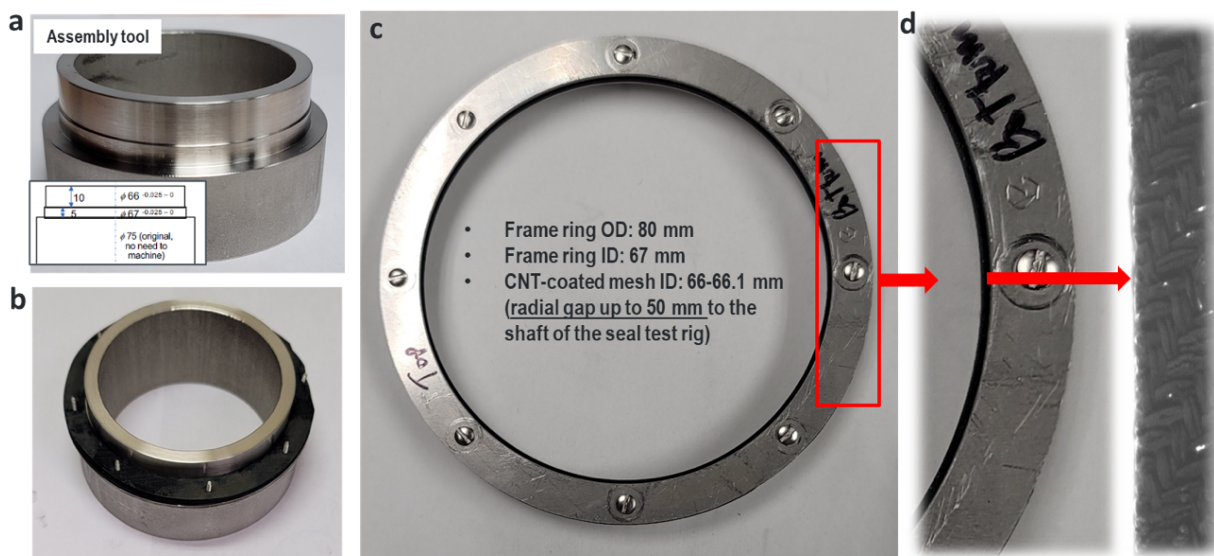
Full assembly of a trial CNT-coated mesh seal using Route 2. (a,b) Assembly tool to control the concentricity among the CNT-coated mesh rings; (c) Full assembly (ID: 66 mm); (d) Zoom-in optical image showing CNTs sealing the mesh openings.
